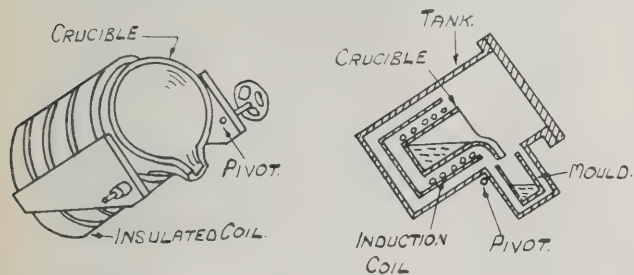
Designs for tilt pouring from vacuum melting furnace
